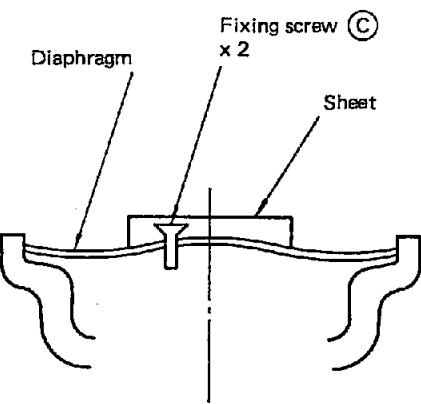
Vacuum Pump for Vacuum Tank (3)
